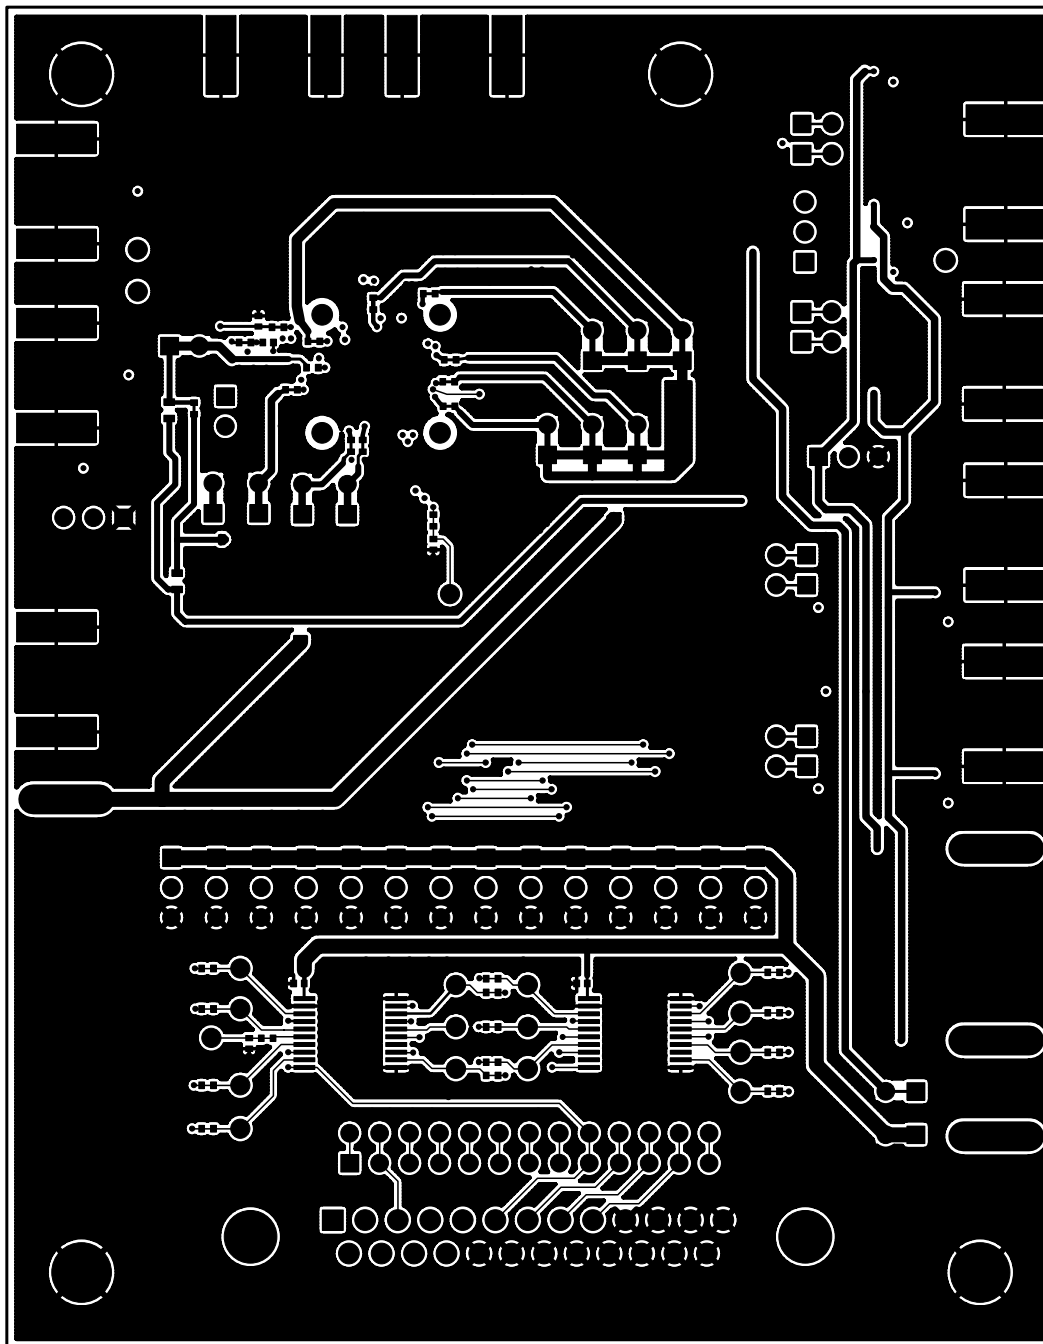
MAX2838 EV Kit PCB Layout—Solder Side
